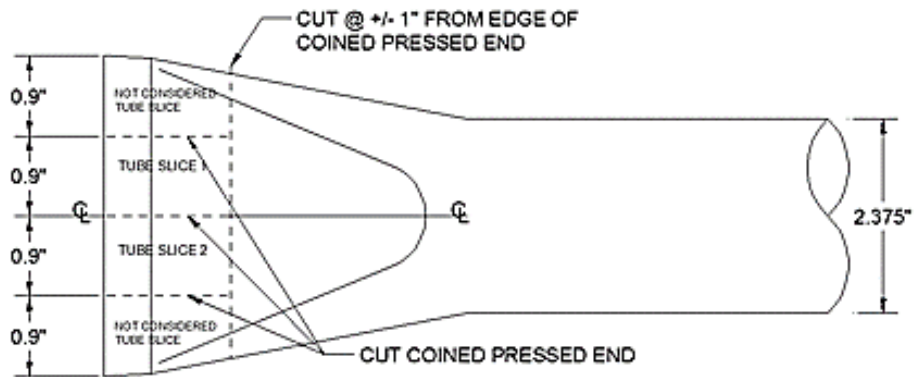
Geometrica® Tubular Element and Projected Cuts
